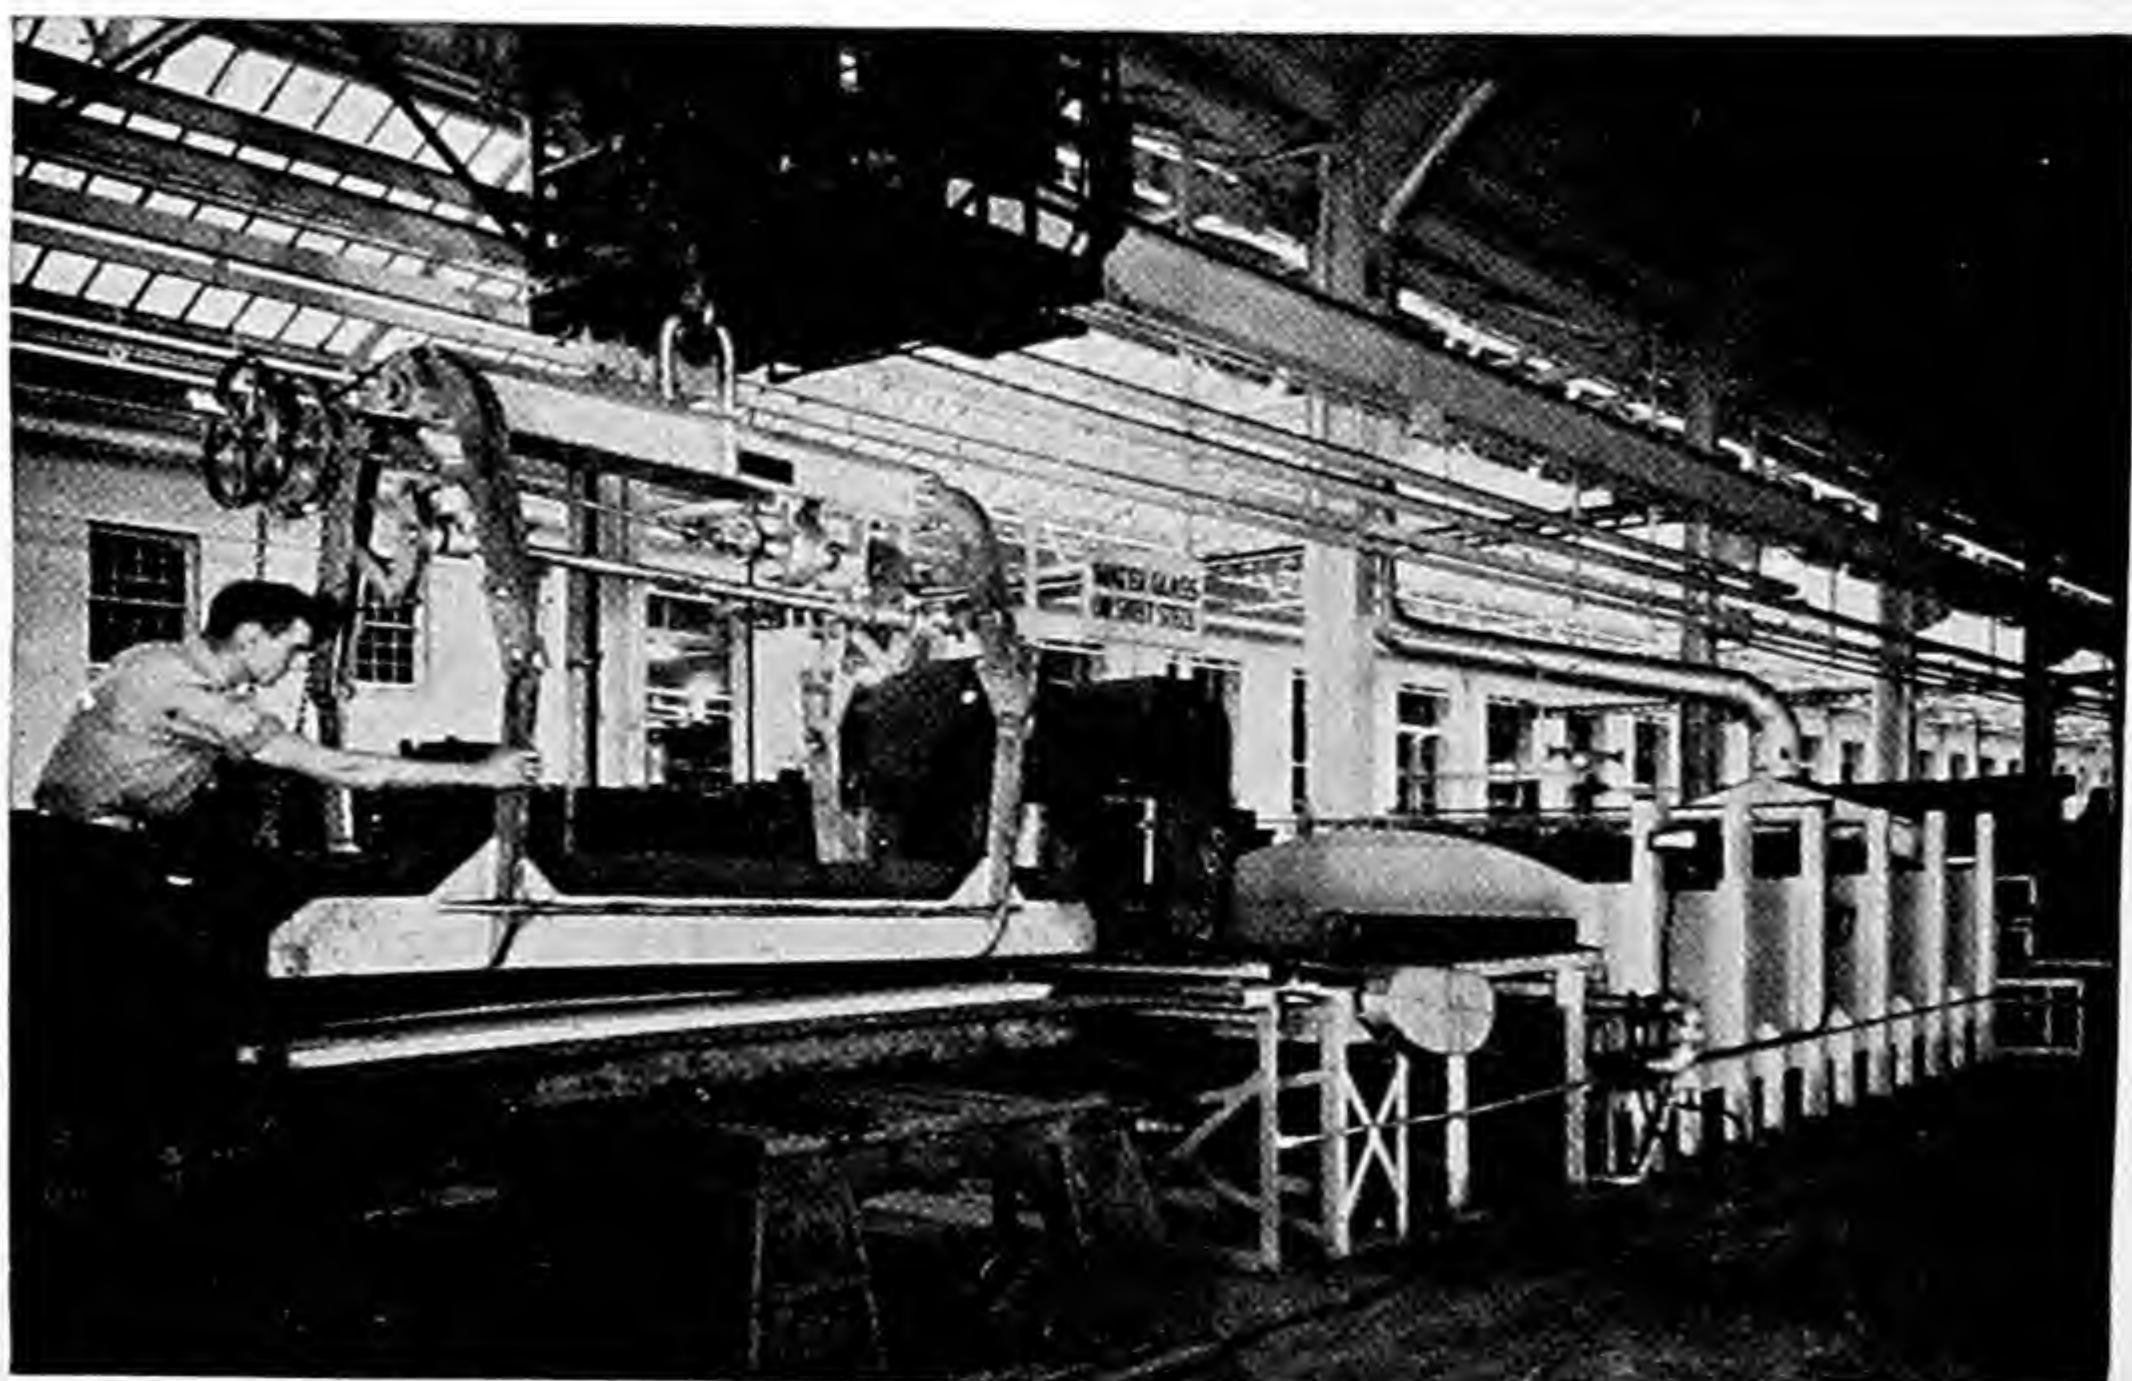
Special handling device used for handling sheet steel at coating process.
